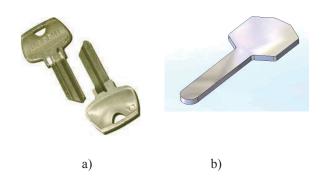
a) The blank key, support by manufacturer. b) The metal plate, no grooves and cuts.
